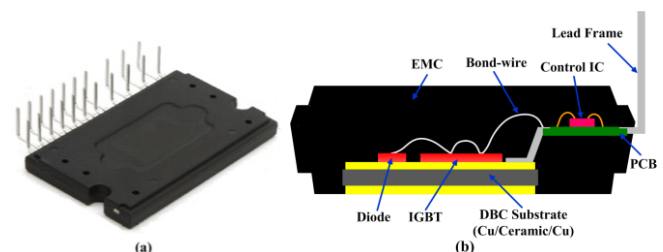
Transfer molded IGBT module (a) physical appearance (b) cross section structure.
